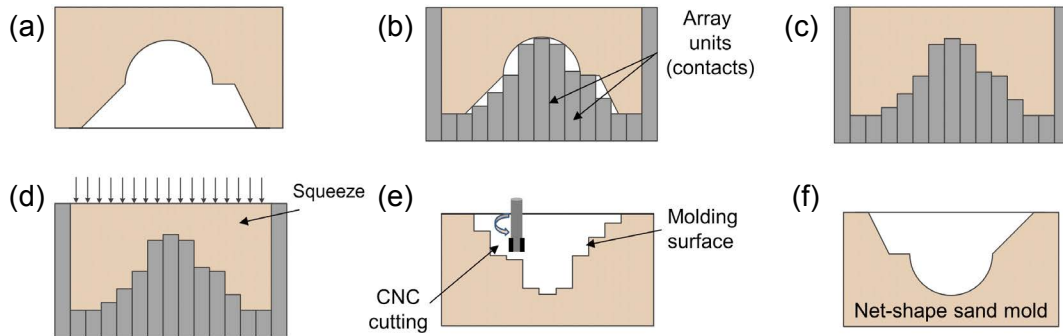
Preparation for flexible extrusion forming process (FEFP) of sand mold^[4]: (a) 3D CAD model; (b) near-shape adjustment of array unit; (c) sand filling; (d) squeeze, curing and demolding; (e) CNC cutting of near-shape sand mold; (f) net-shaped sand mold
